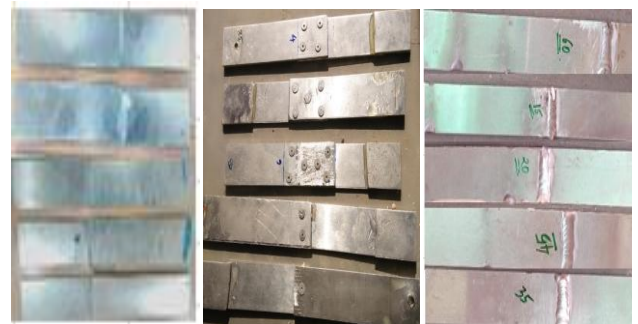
Adhesive Fig. 2: Riveted Fig. 3: welded joint
